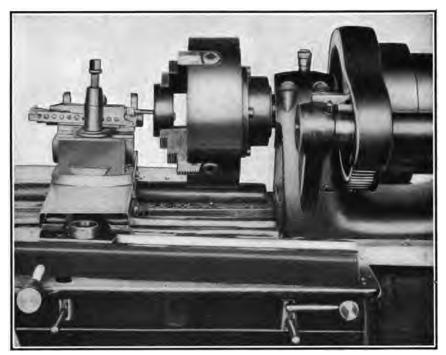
INDICATING REAR FACE OF A CHUCK JOB
